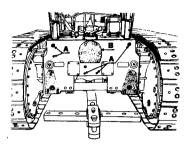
Removing Draw Bar Brackets and Case Cover
